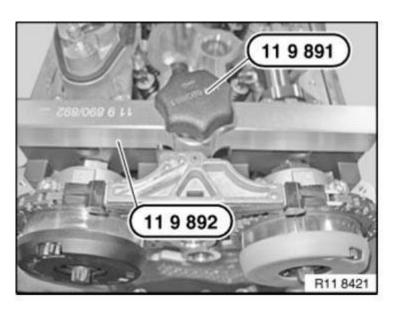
Positioning Special Tool 11 9 893 On Inlet And Exhaust Camshafts Courtesy of BMW OF NORTH AMERICA, INC.
